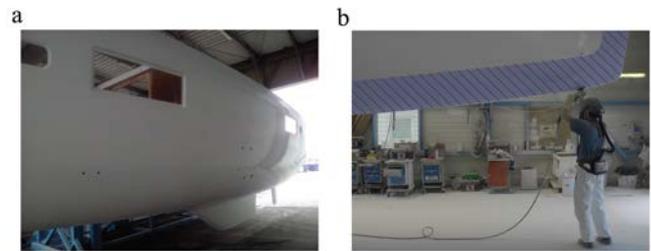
(a) Side view of one catamaran hulls; (b) An operator is sanding the sealing edge. Hatches shows workzones for manual sanding.
